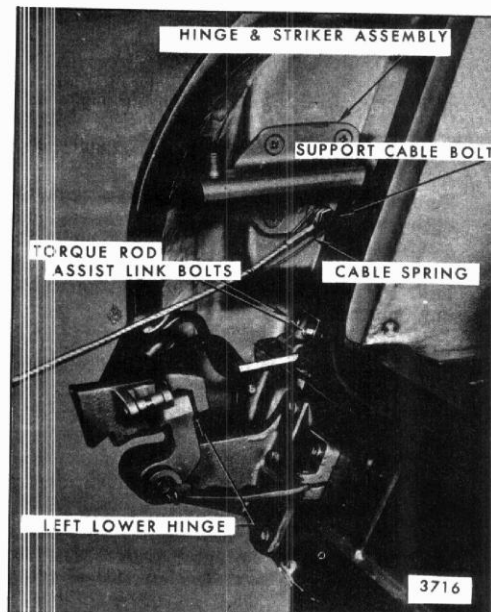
Dual Acting Tail Gate Left Upper and Lower Hinge and Support Cable Attachment
